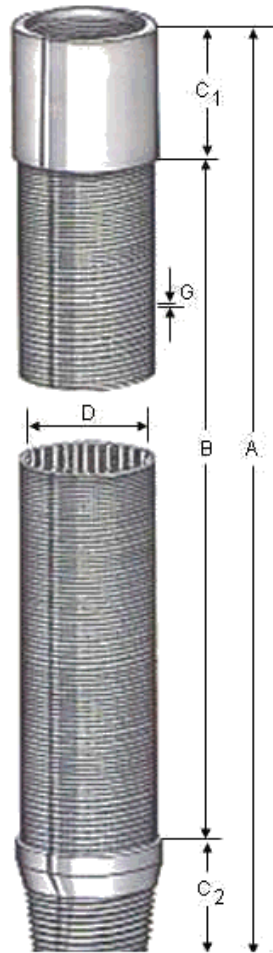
Illustrates the major dimensions and components making up a Rod Base Screen.
